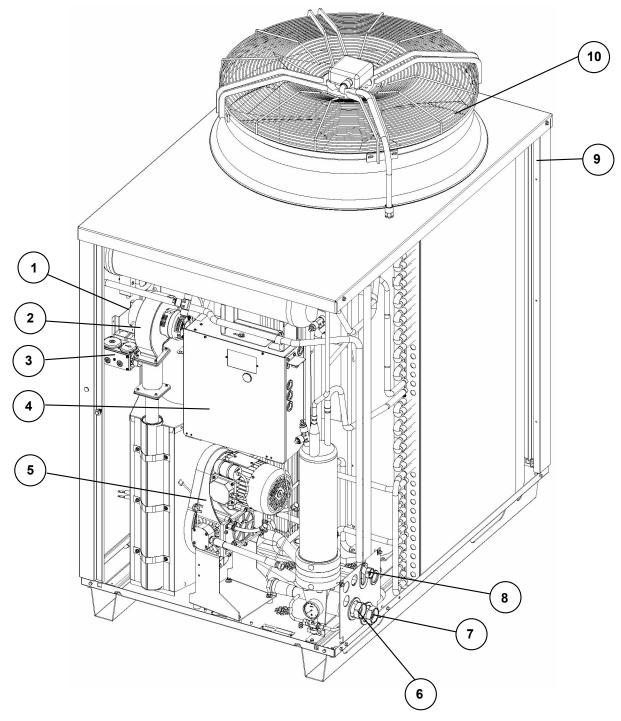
ACF-HR Service plate with plumbing and gas connections
